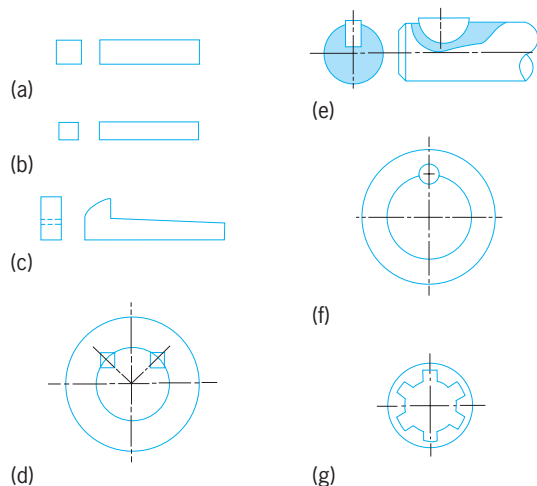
Types of keys. (a) Square key. (b) Flat key. (c) Taper key with gib head. (d) Kennedy key. (e) Woodruff key. (f) Round key. (g) Spline fitting. (After P. H. Black and O. E. Adams, Jr., *Machine Design*, 3d ed., McGraw-Hill, 1968)
